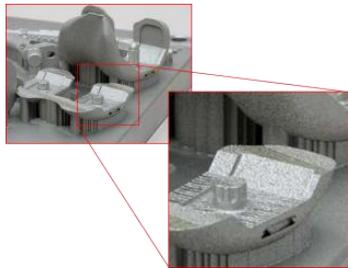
Existing metal 3D printing quality problems- removing support structure, tolerance, surface finish [12,13].
